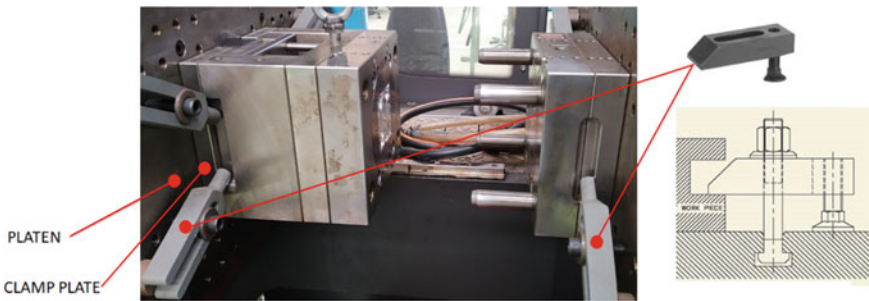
Mold hold by a mold clamp and its schema, by David López-Adrio
